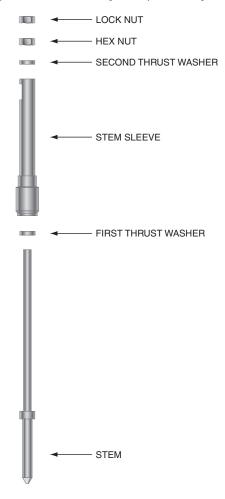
Two-Piece Non-rotating Stem Assembly (Exploded)
